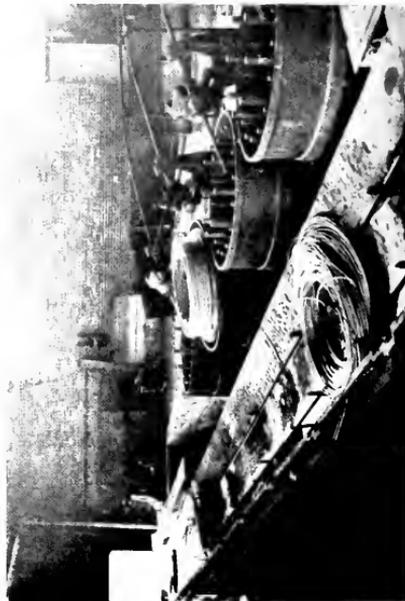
Edwards Pouring Reels and Bundle Conveyor in Rod Mill
